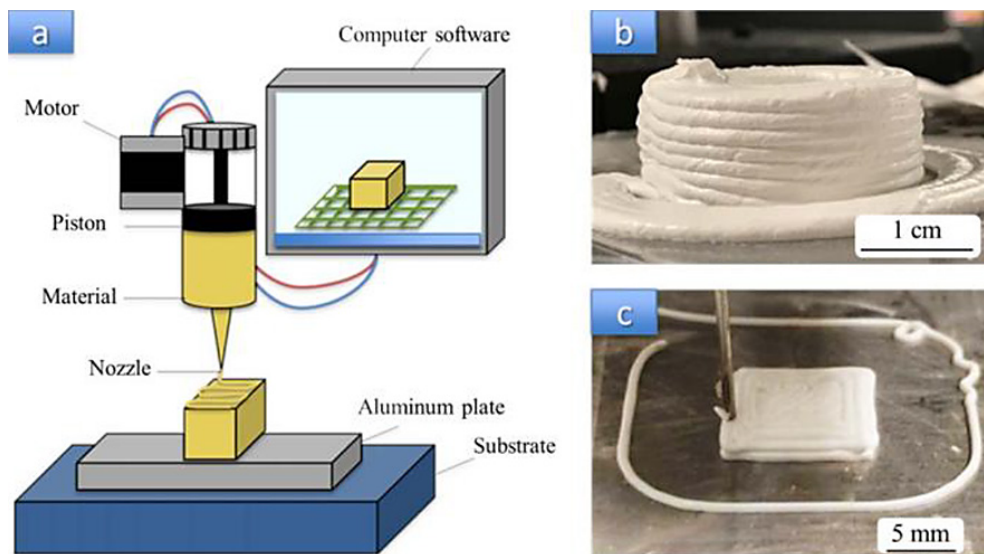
(a) Structure of 3D printing machine used for paste extrusion, (b) 3D printed cylinder structure, (c) 3D printing process of a square structure [74]
